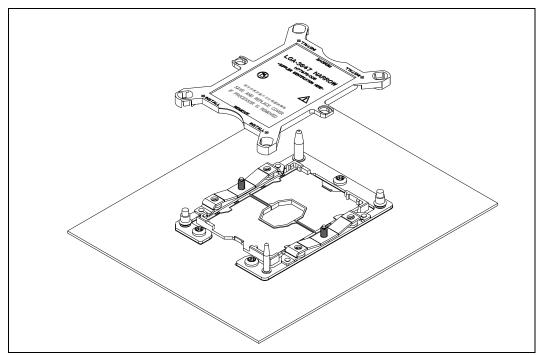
LGA3647-0 Bolster Plate in Installed Position with the Socket Dust Cover
